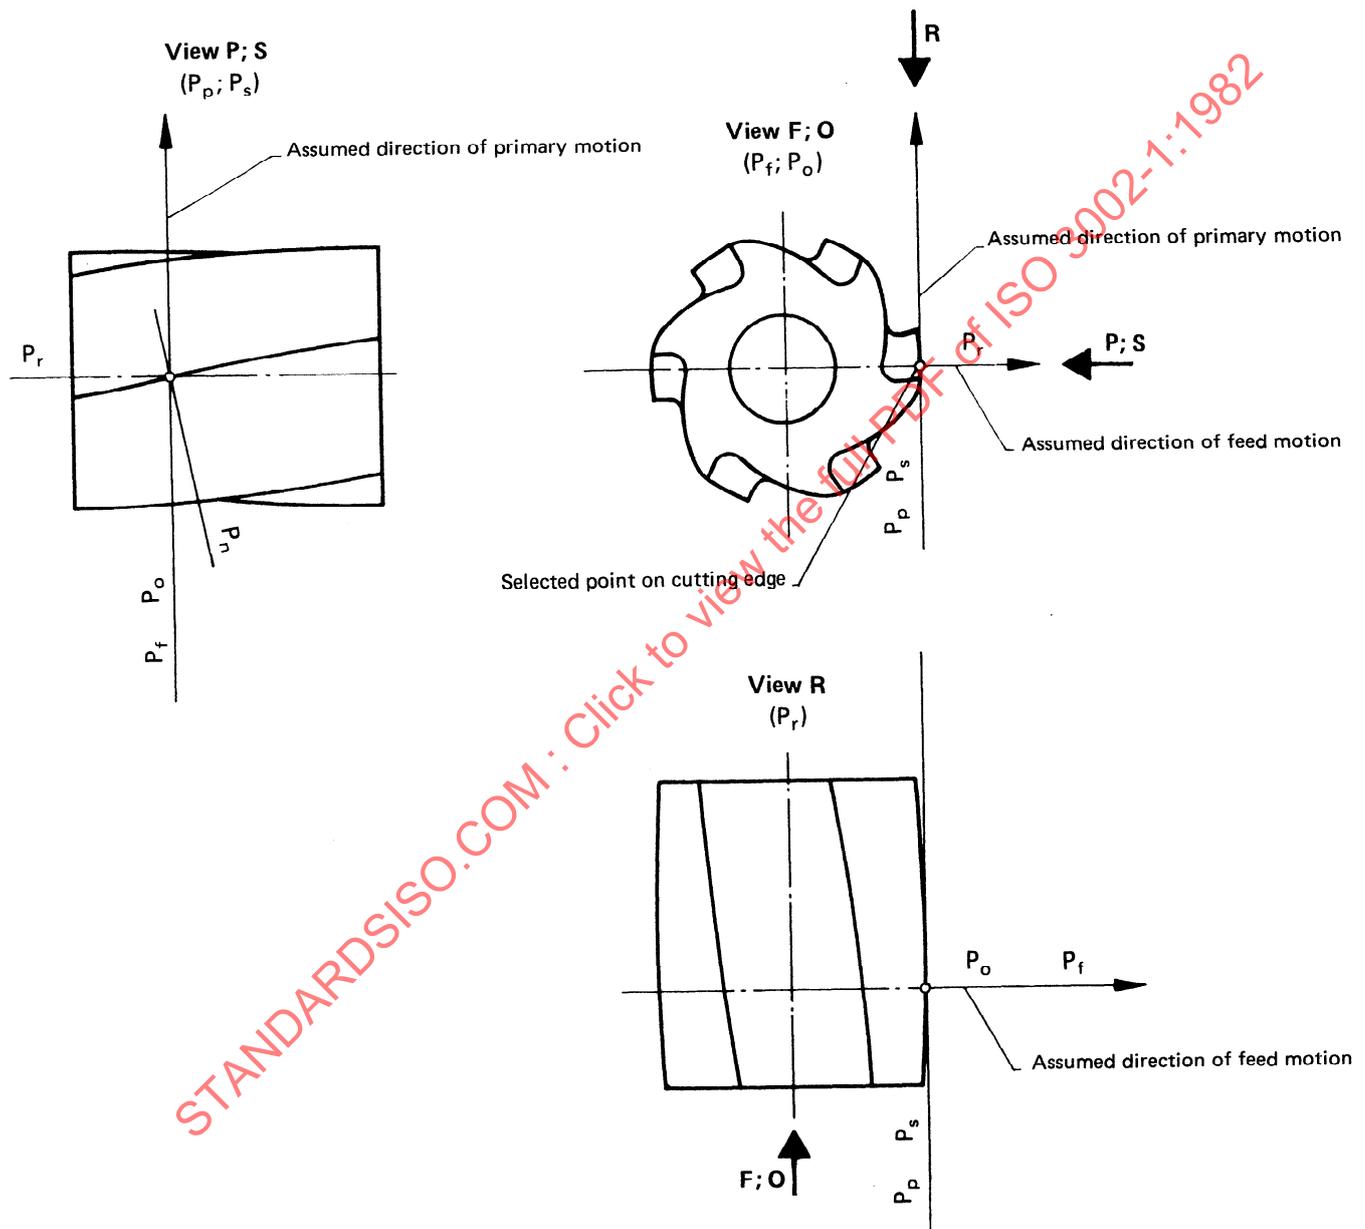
Planes in the tool-in-hand system — Slab milling cutter
